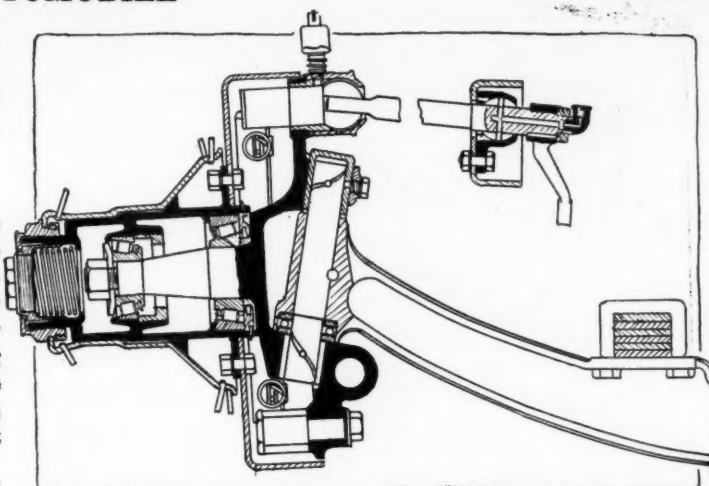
Argyll front wheel brake operated through short universal shaft from bracket on frame sill. Universal at brake is located on same center line as steering swivel so expanding cam is unaffected by steering
